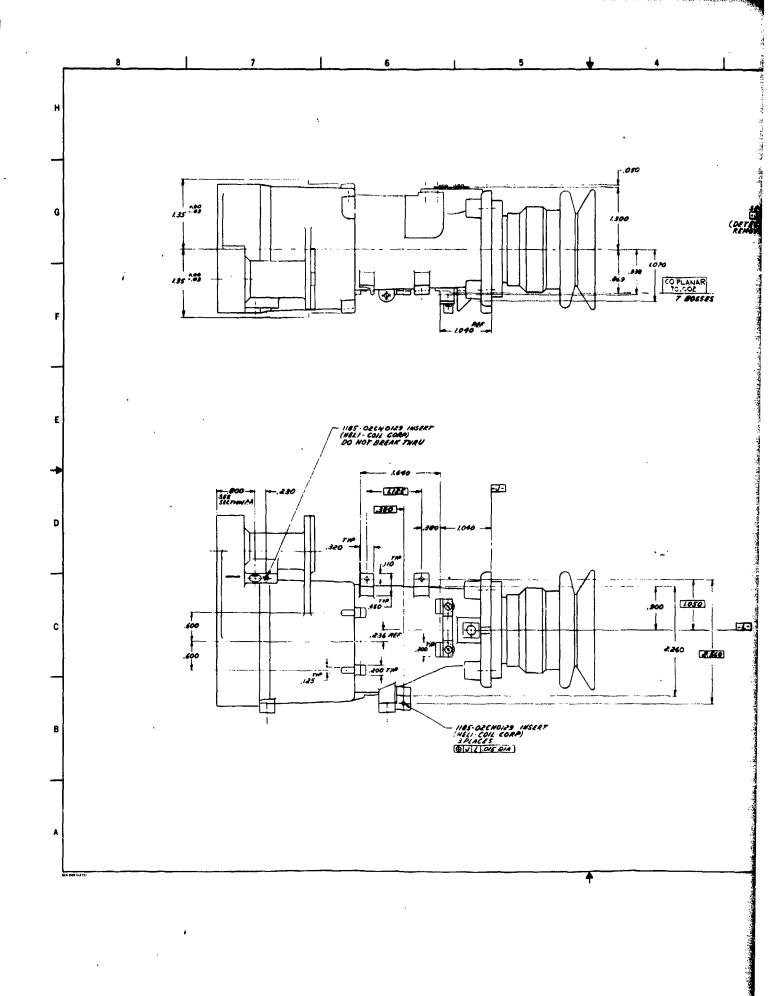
Optical Assembly Outline Drawing (Sheet 1 of 2)
